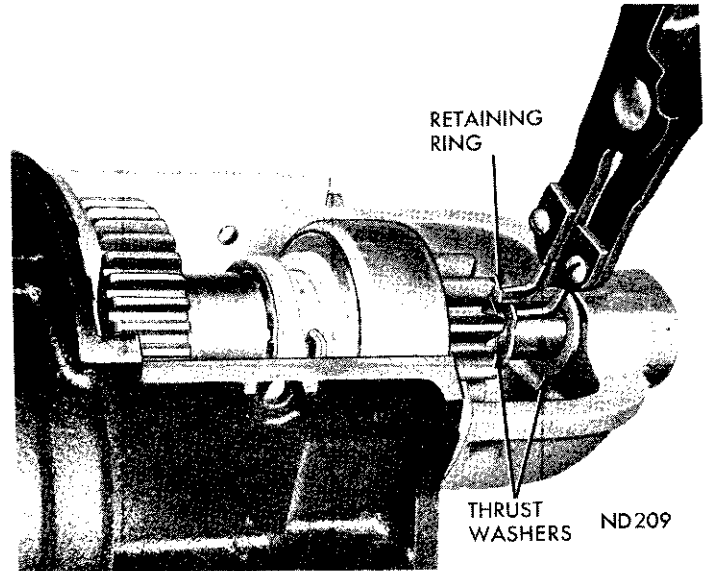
Removing or Installing Piston Shaft Retainer Ring
